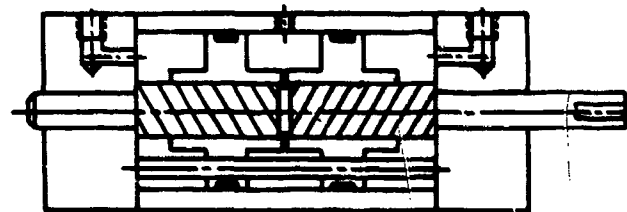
Double Helical-Spline Rotary Piston-Cylinder Actuator
